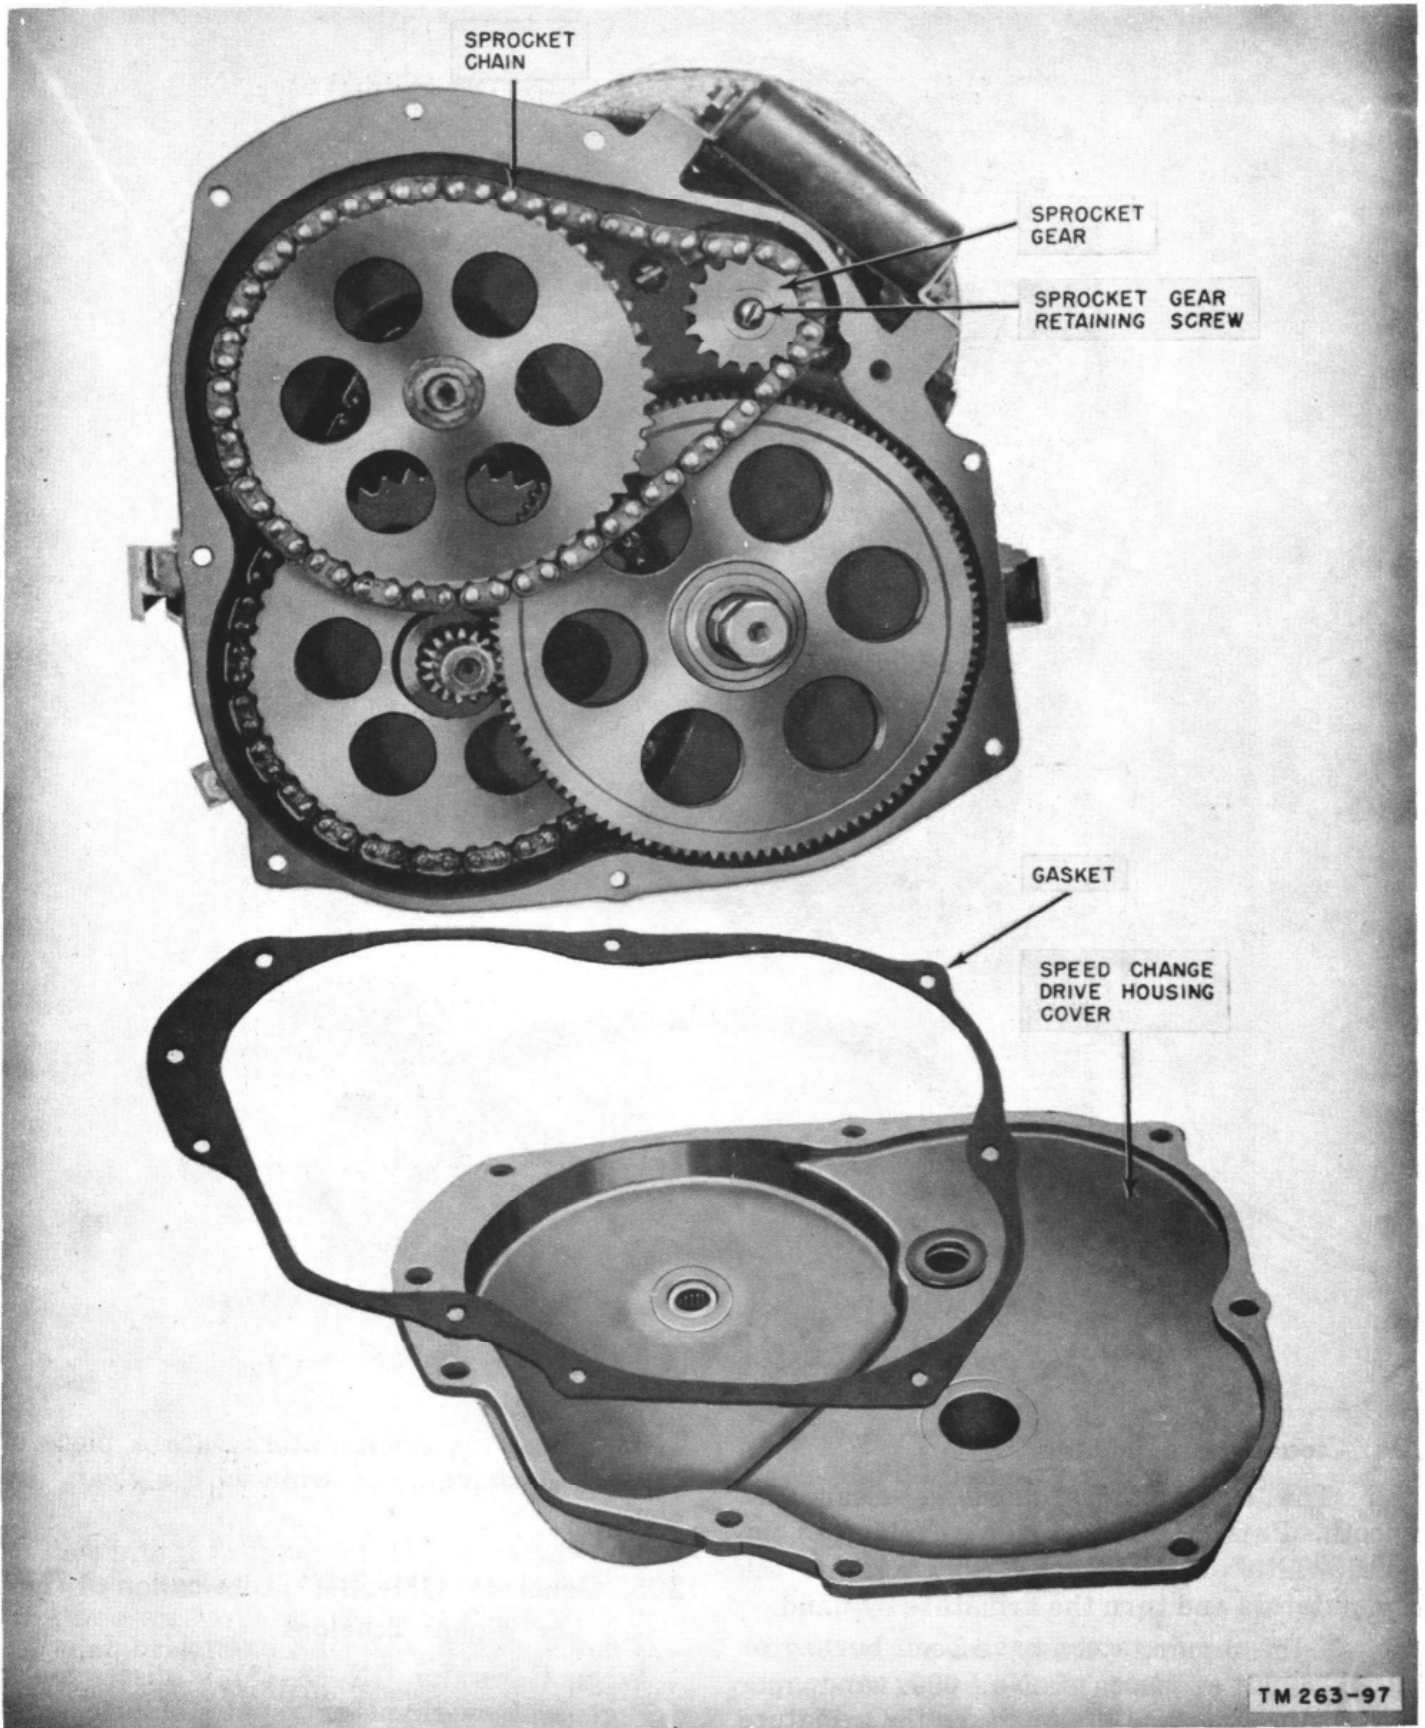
Speed change drive housing, gasket, and cover removed from Generator GN-58-(\*).
